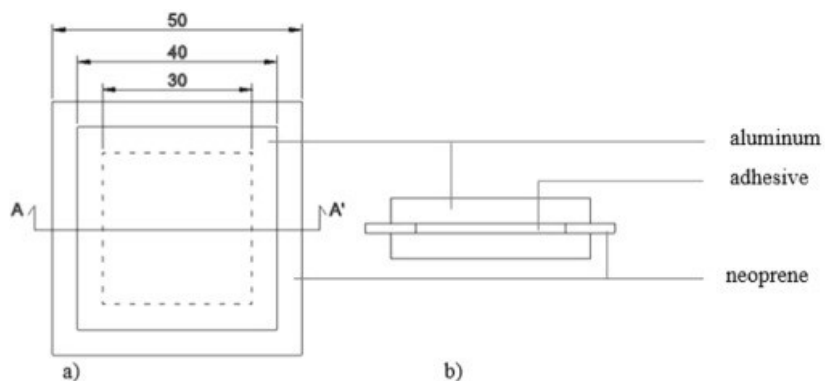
Specimens' geometry (mm): a) plane; b) section view.
